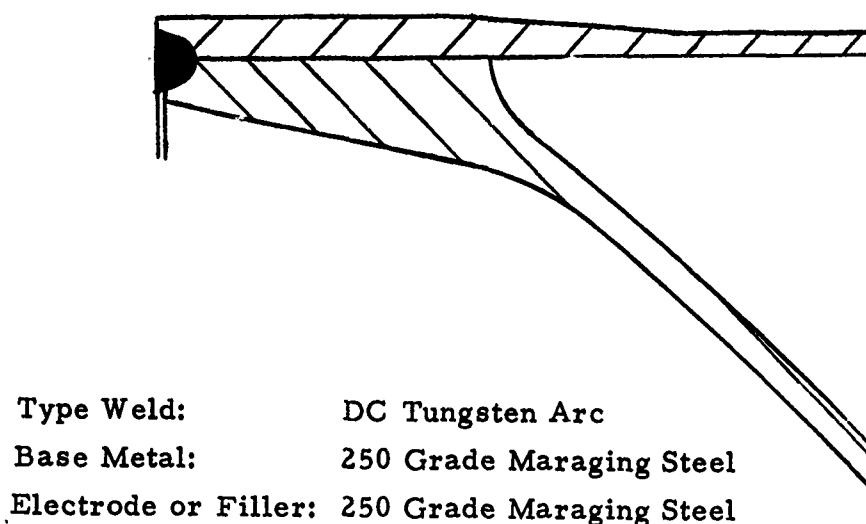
Tank Closure-to-Shell Weld Joint
